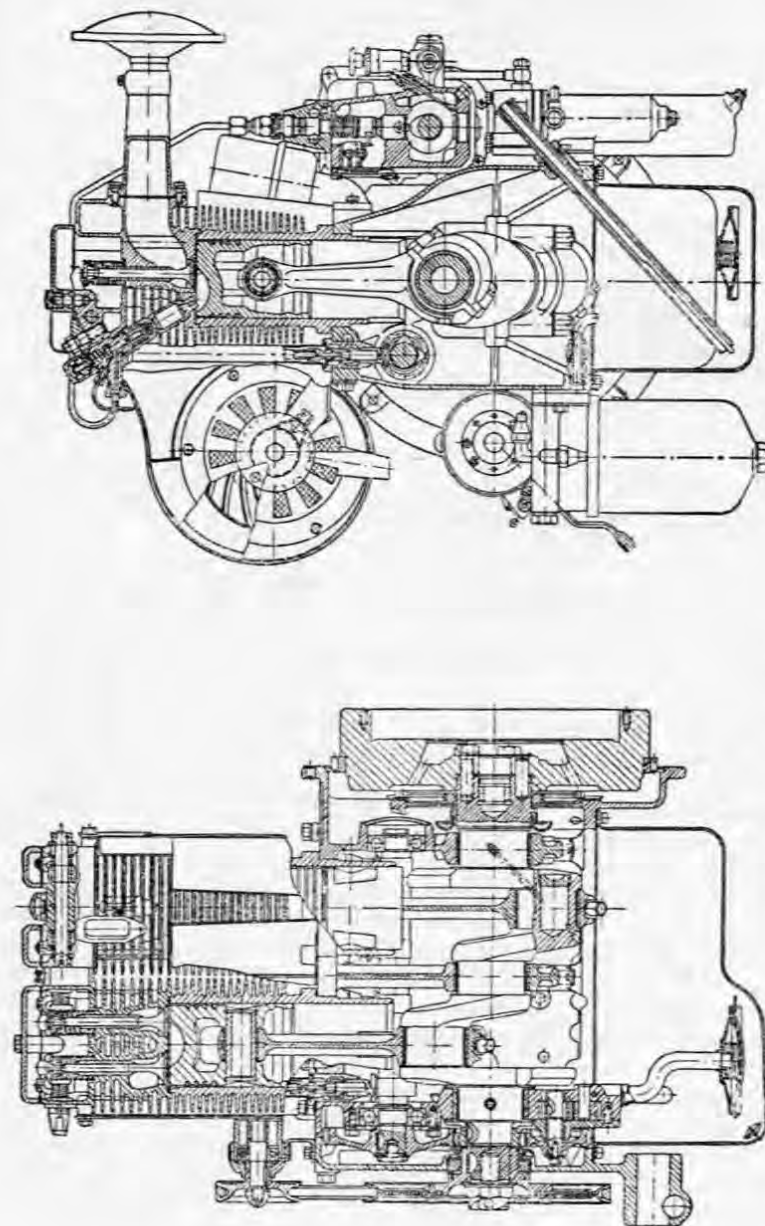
Longitudinal and transverse sections of the N.A.T.I. engine.
